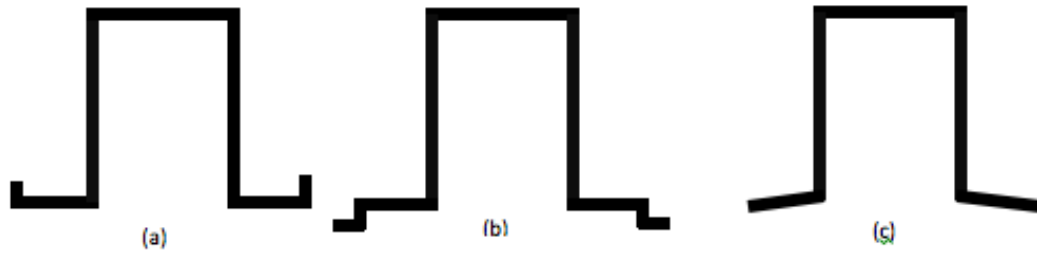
Frontal profile of parts affected by typical deformations impressed by shearing
